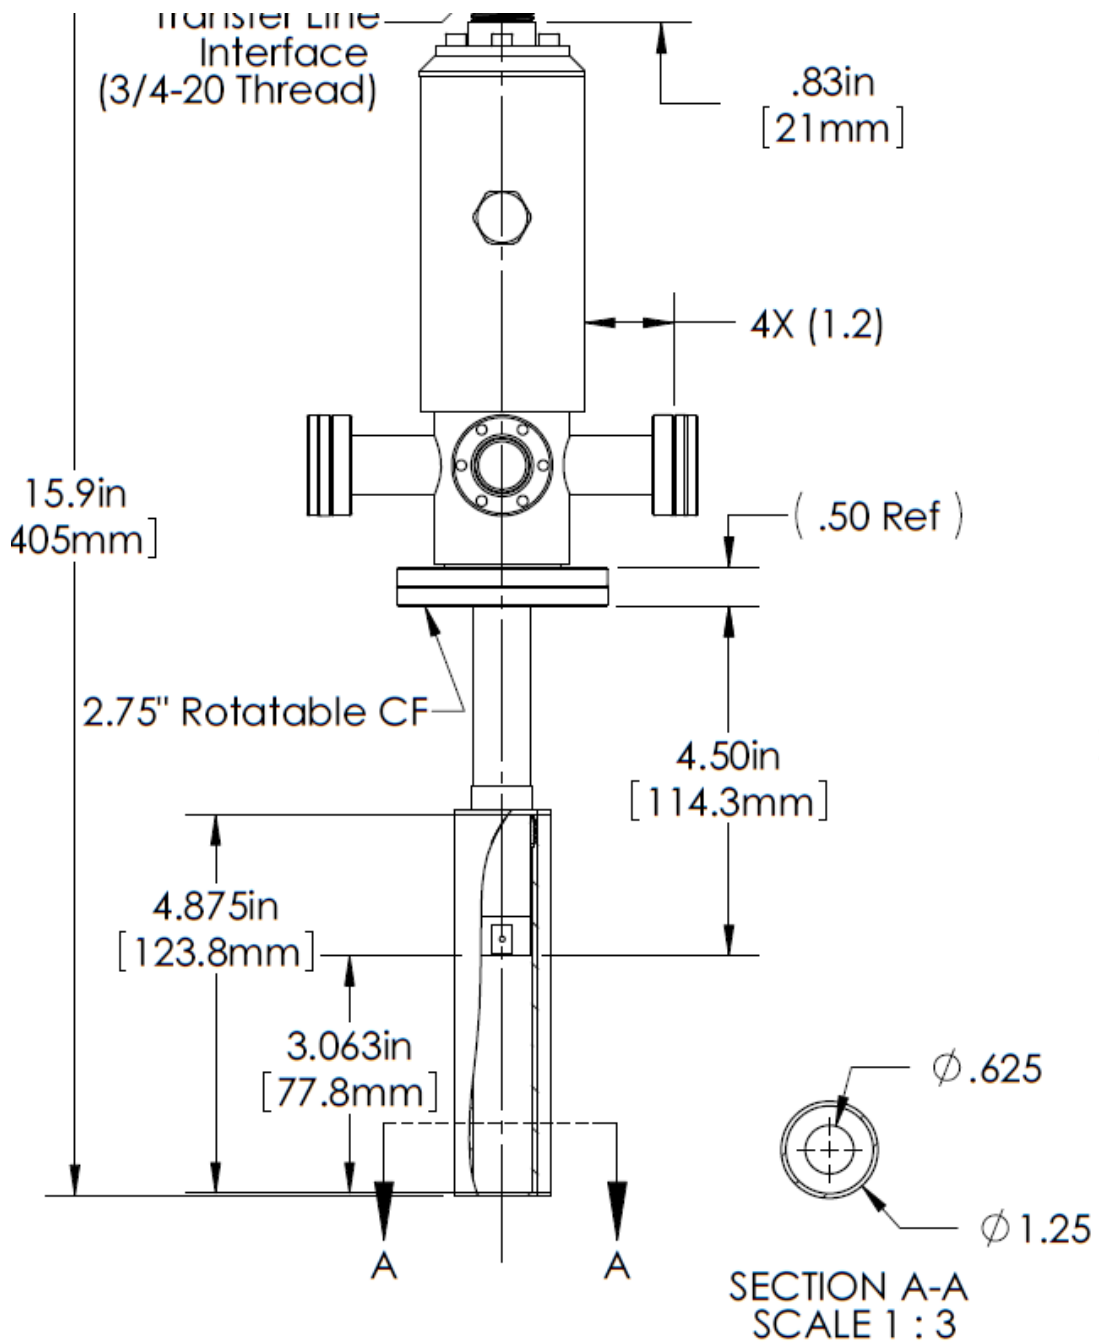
The assembly drawing of the LT-3B cryostat with dimensions. The drawing is with the radiation shield mounted on the cold finger. Drawing from Advanced Research Systems, Inc.
